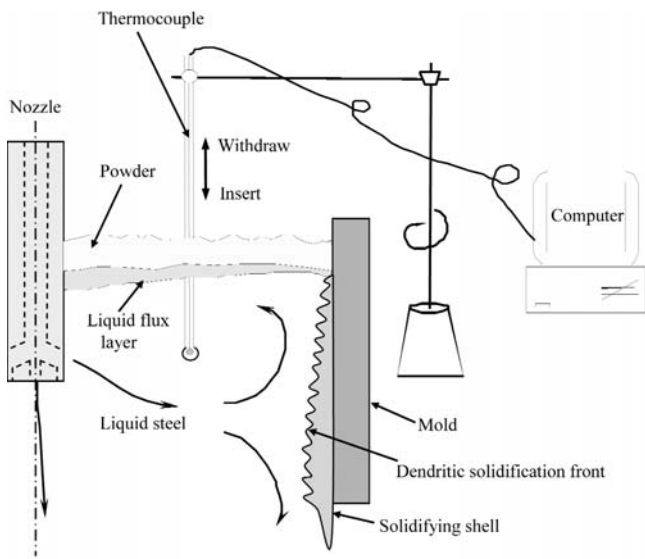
Continuous-casting mold and apparatus to measure temperature in the liquid pool.
